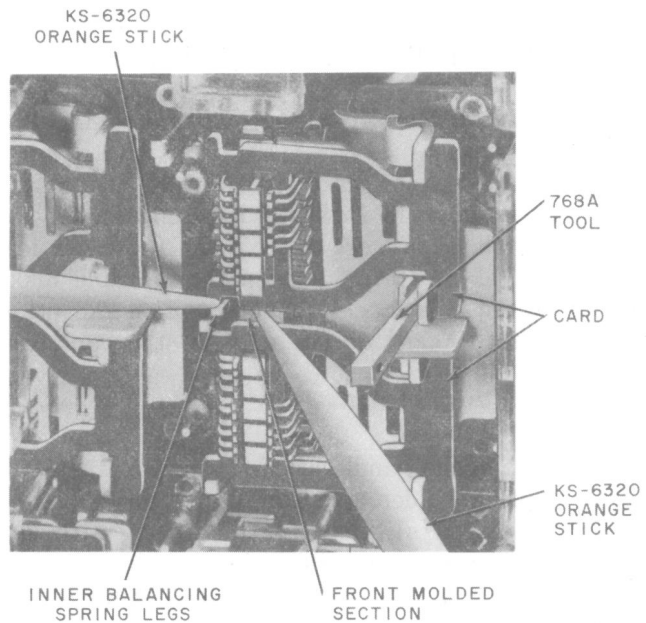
AM-Type Relay—Disengaging Inner Balancing Spring Leg From Upper Card
